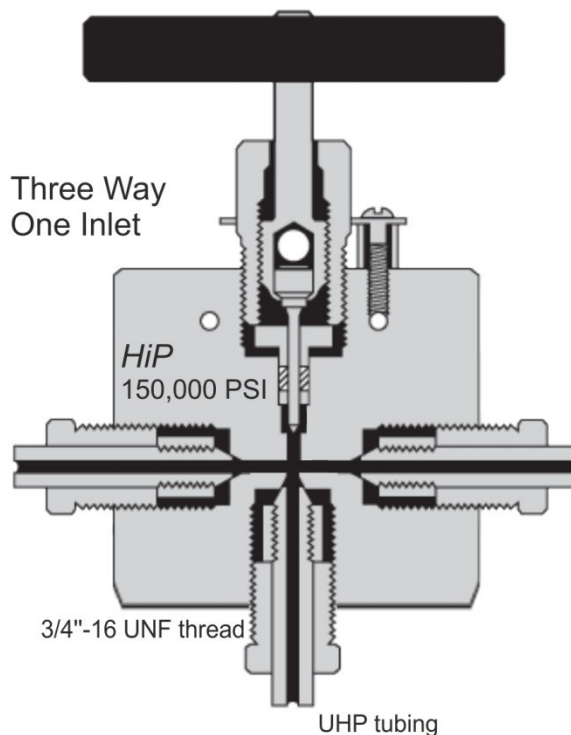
(right) UHP valve which are used within the tubing construction. Model HiP (150-14XF6) 150,000 PSI (1 GPa)
